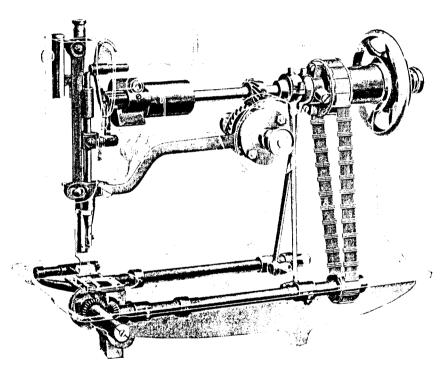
"X-ray" view of Machine 107w1 showing the Interior Placement of the Working Parts
